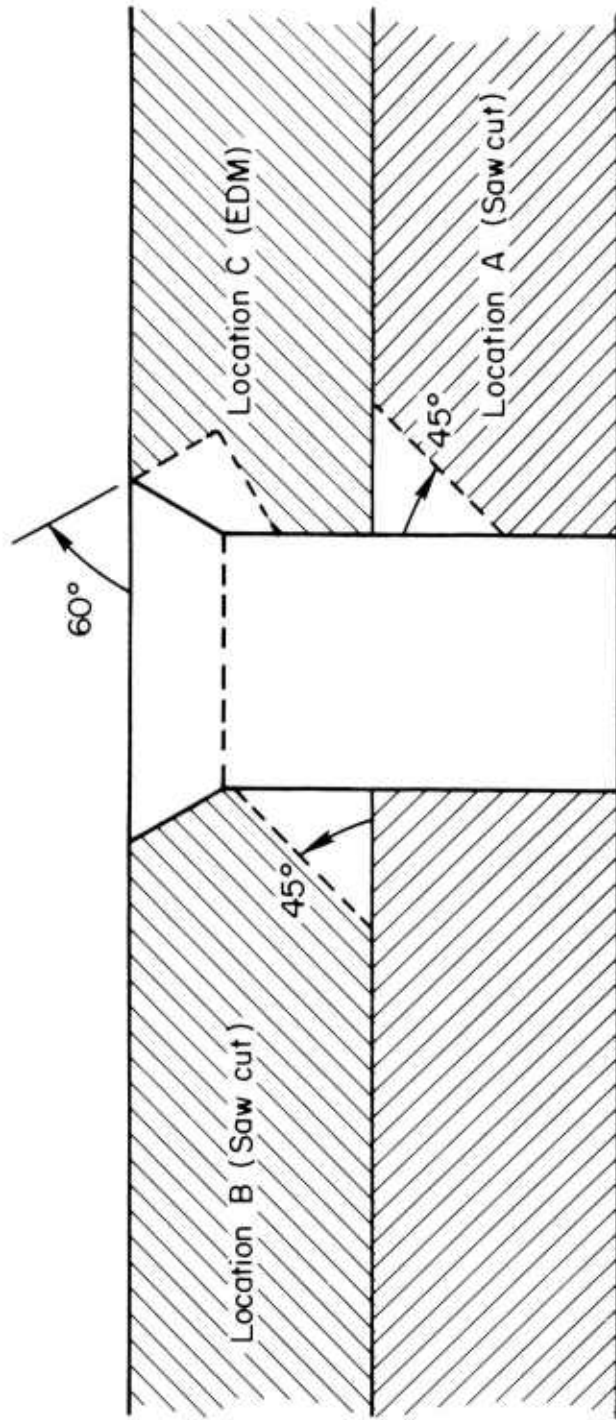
THREE LOCATIONS OF SAW CUTS AND EDM CRACKS IN FASTENER HOLES
